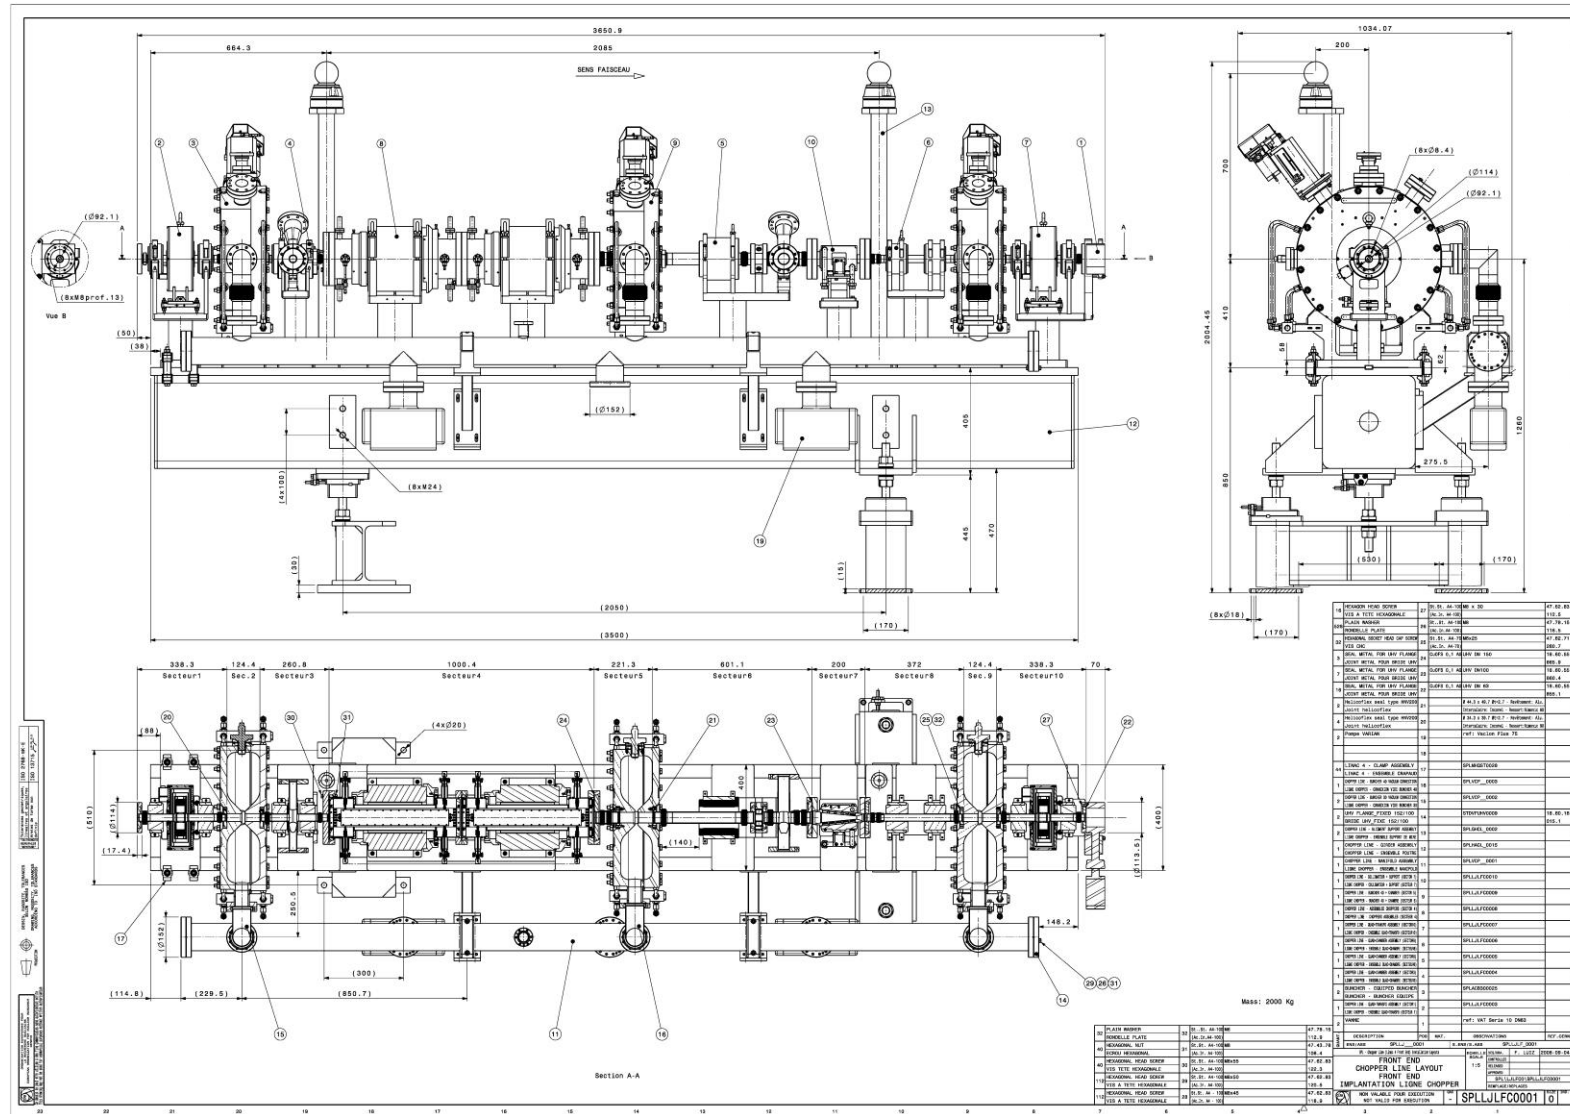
Detailed drawing of the 3 MeV Chopper Line.
